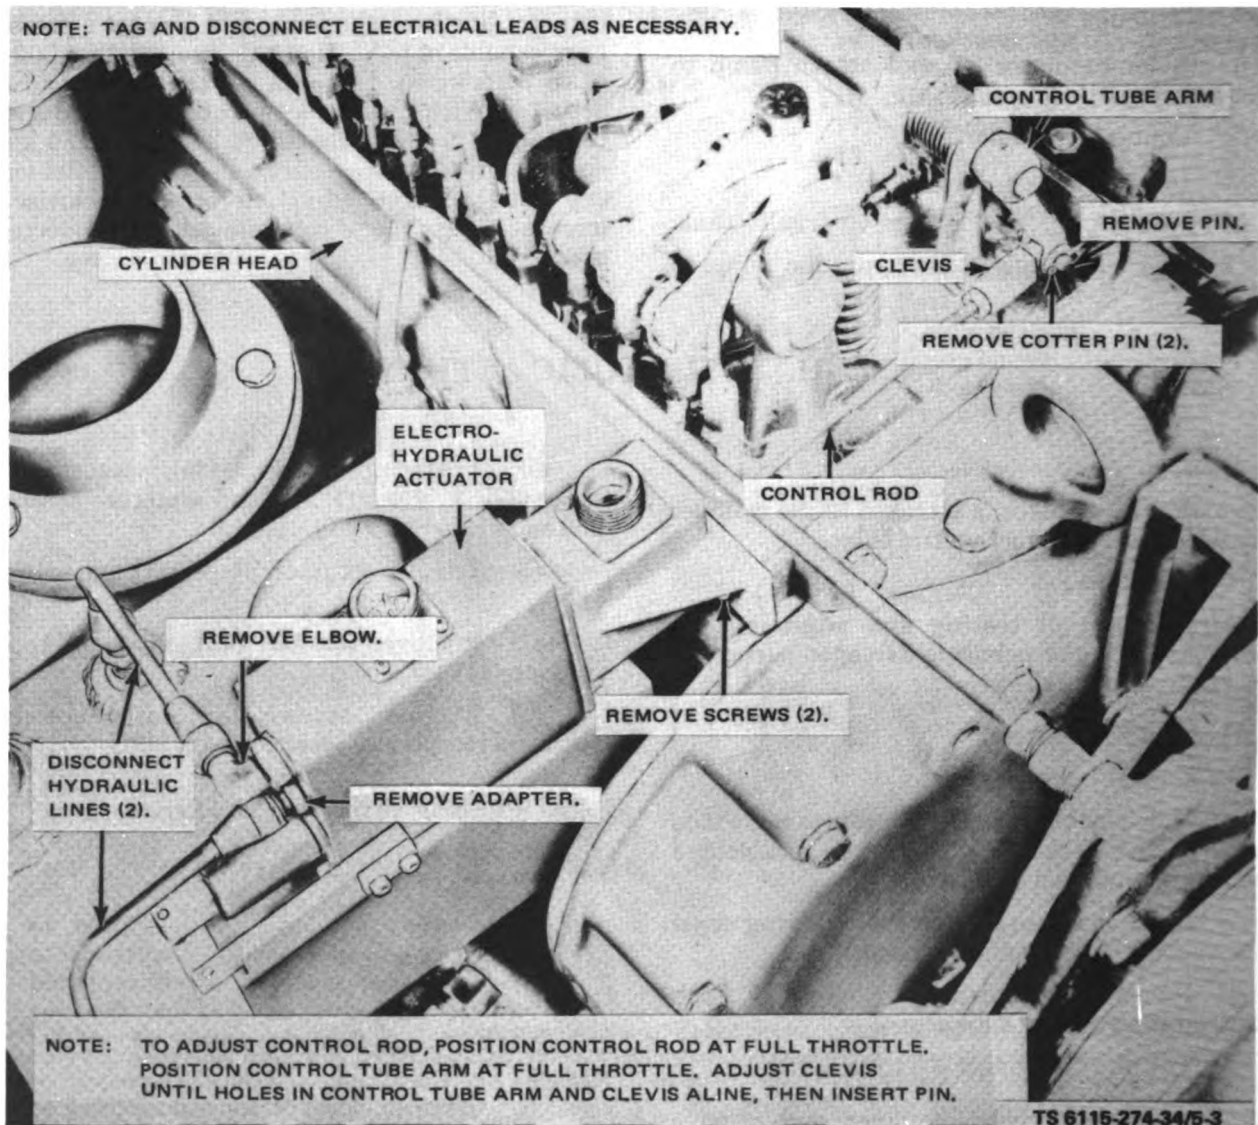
Electrohydraulic Actuator, Removal and Installation
